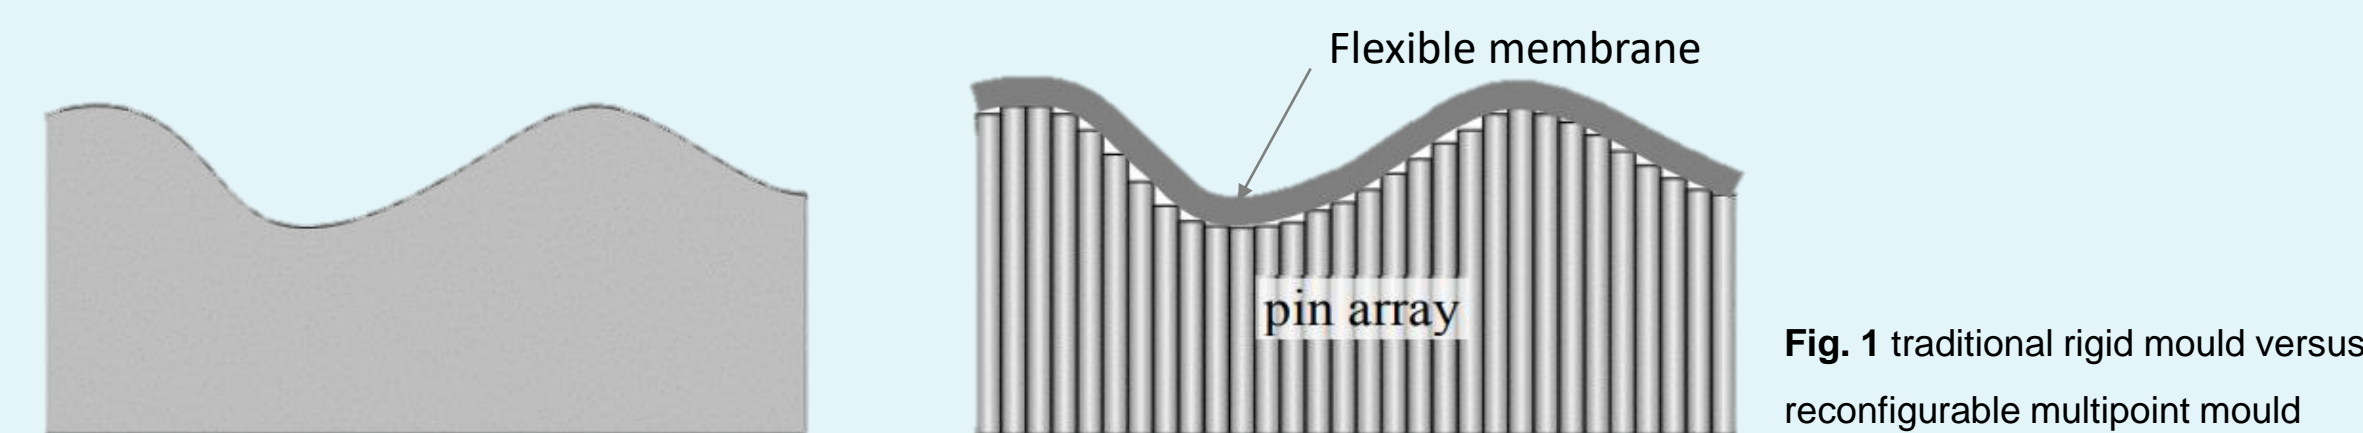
traditional rigid mould versus reconfigurable multipoint mould
